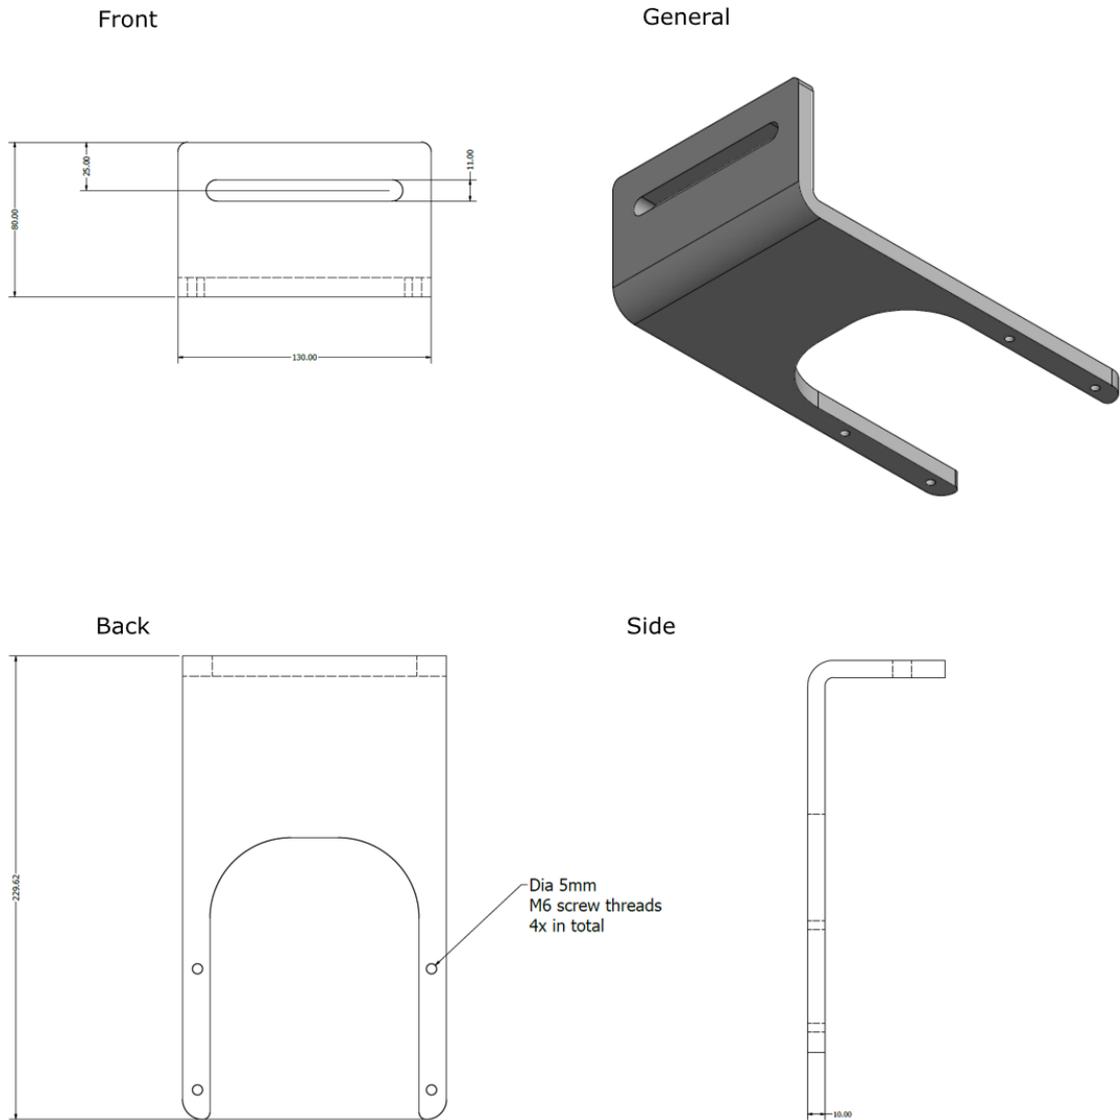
L-PIECE SUPPORT FOR RECEIVER
